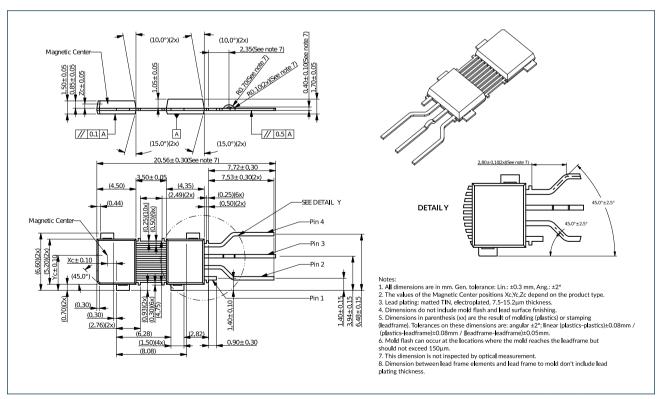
DMP-4 - Package Outline Dimensions (POD) - STD2 2.54
